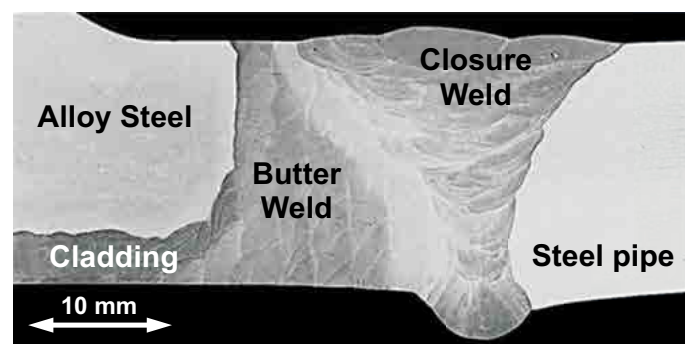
Macrostructure of welded joint connecting gas branch pipe made of steel grade AISI 8630 with pipe made of steel grade X65, wall thickness 20 mm [1]
